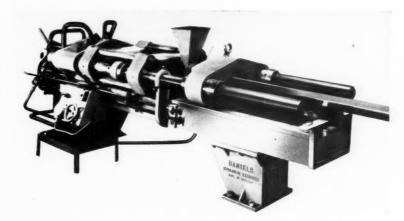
Daniels Extrusion Press with Automatically Reciprocating Hydraulic Ram
